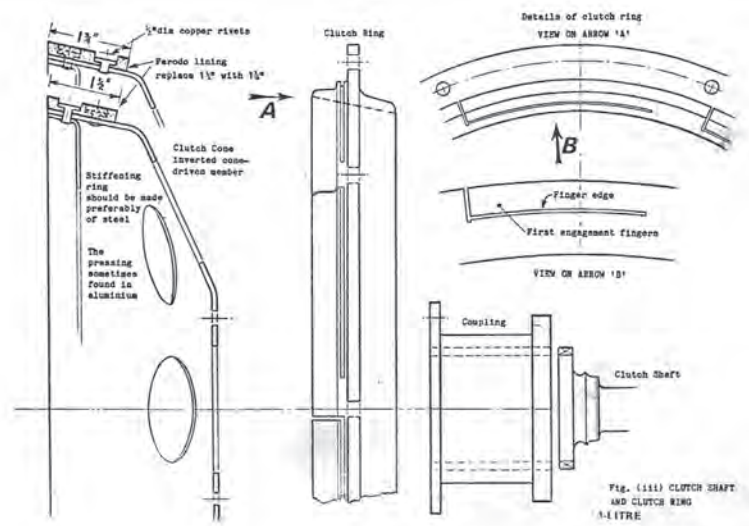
CLUTCH SHAFT AND CLUTCH RING 1-1 LITRE
